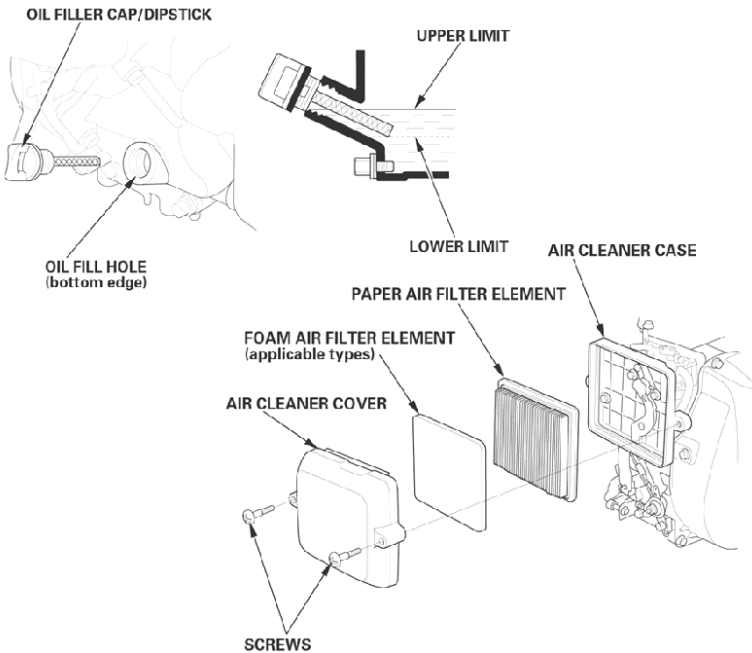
Check Engine Oil / Air Filter (if equipped)
